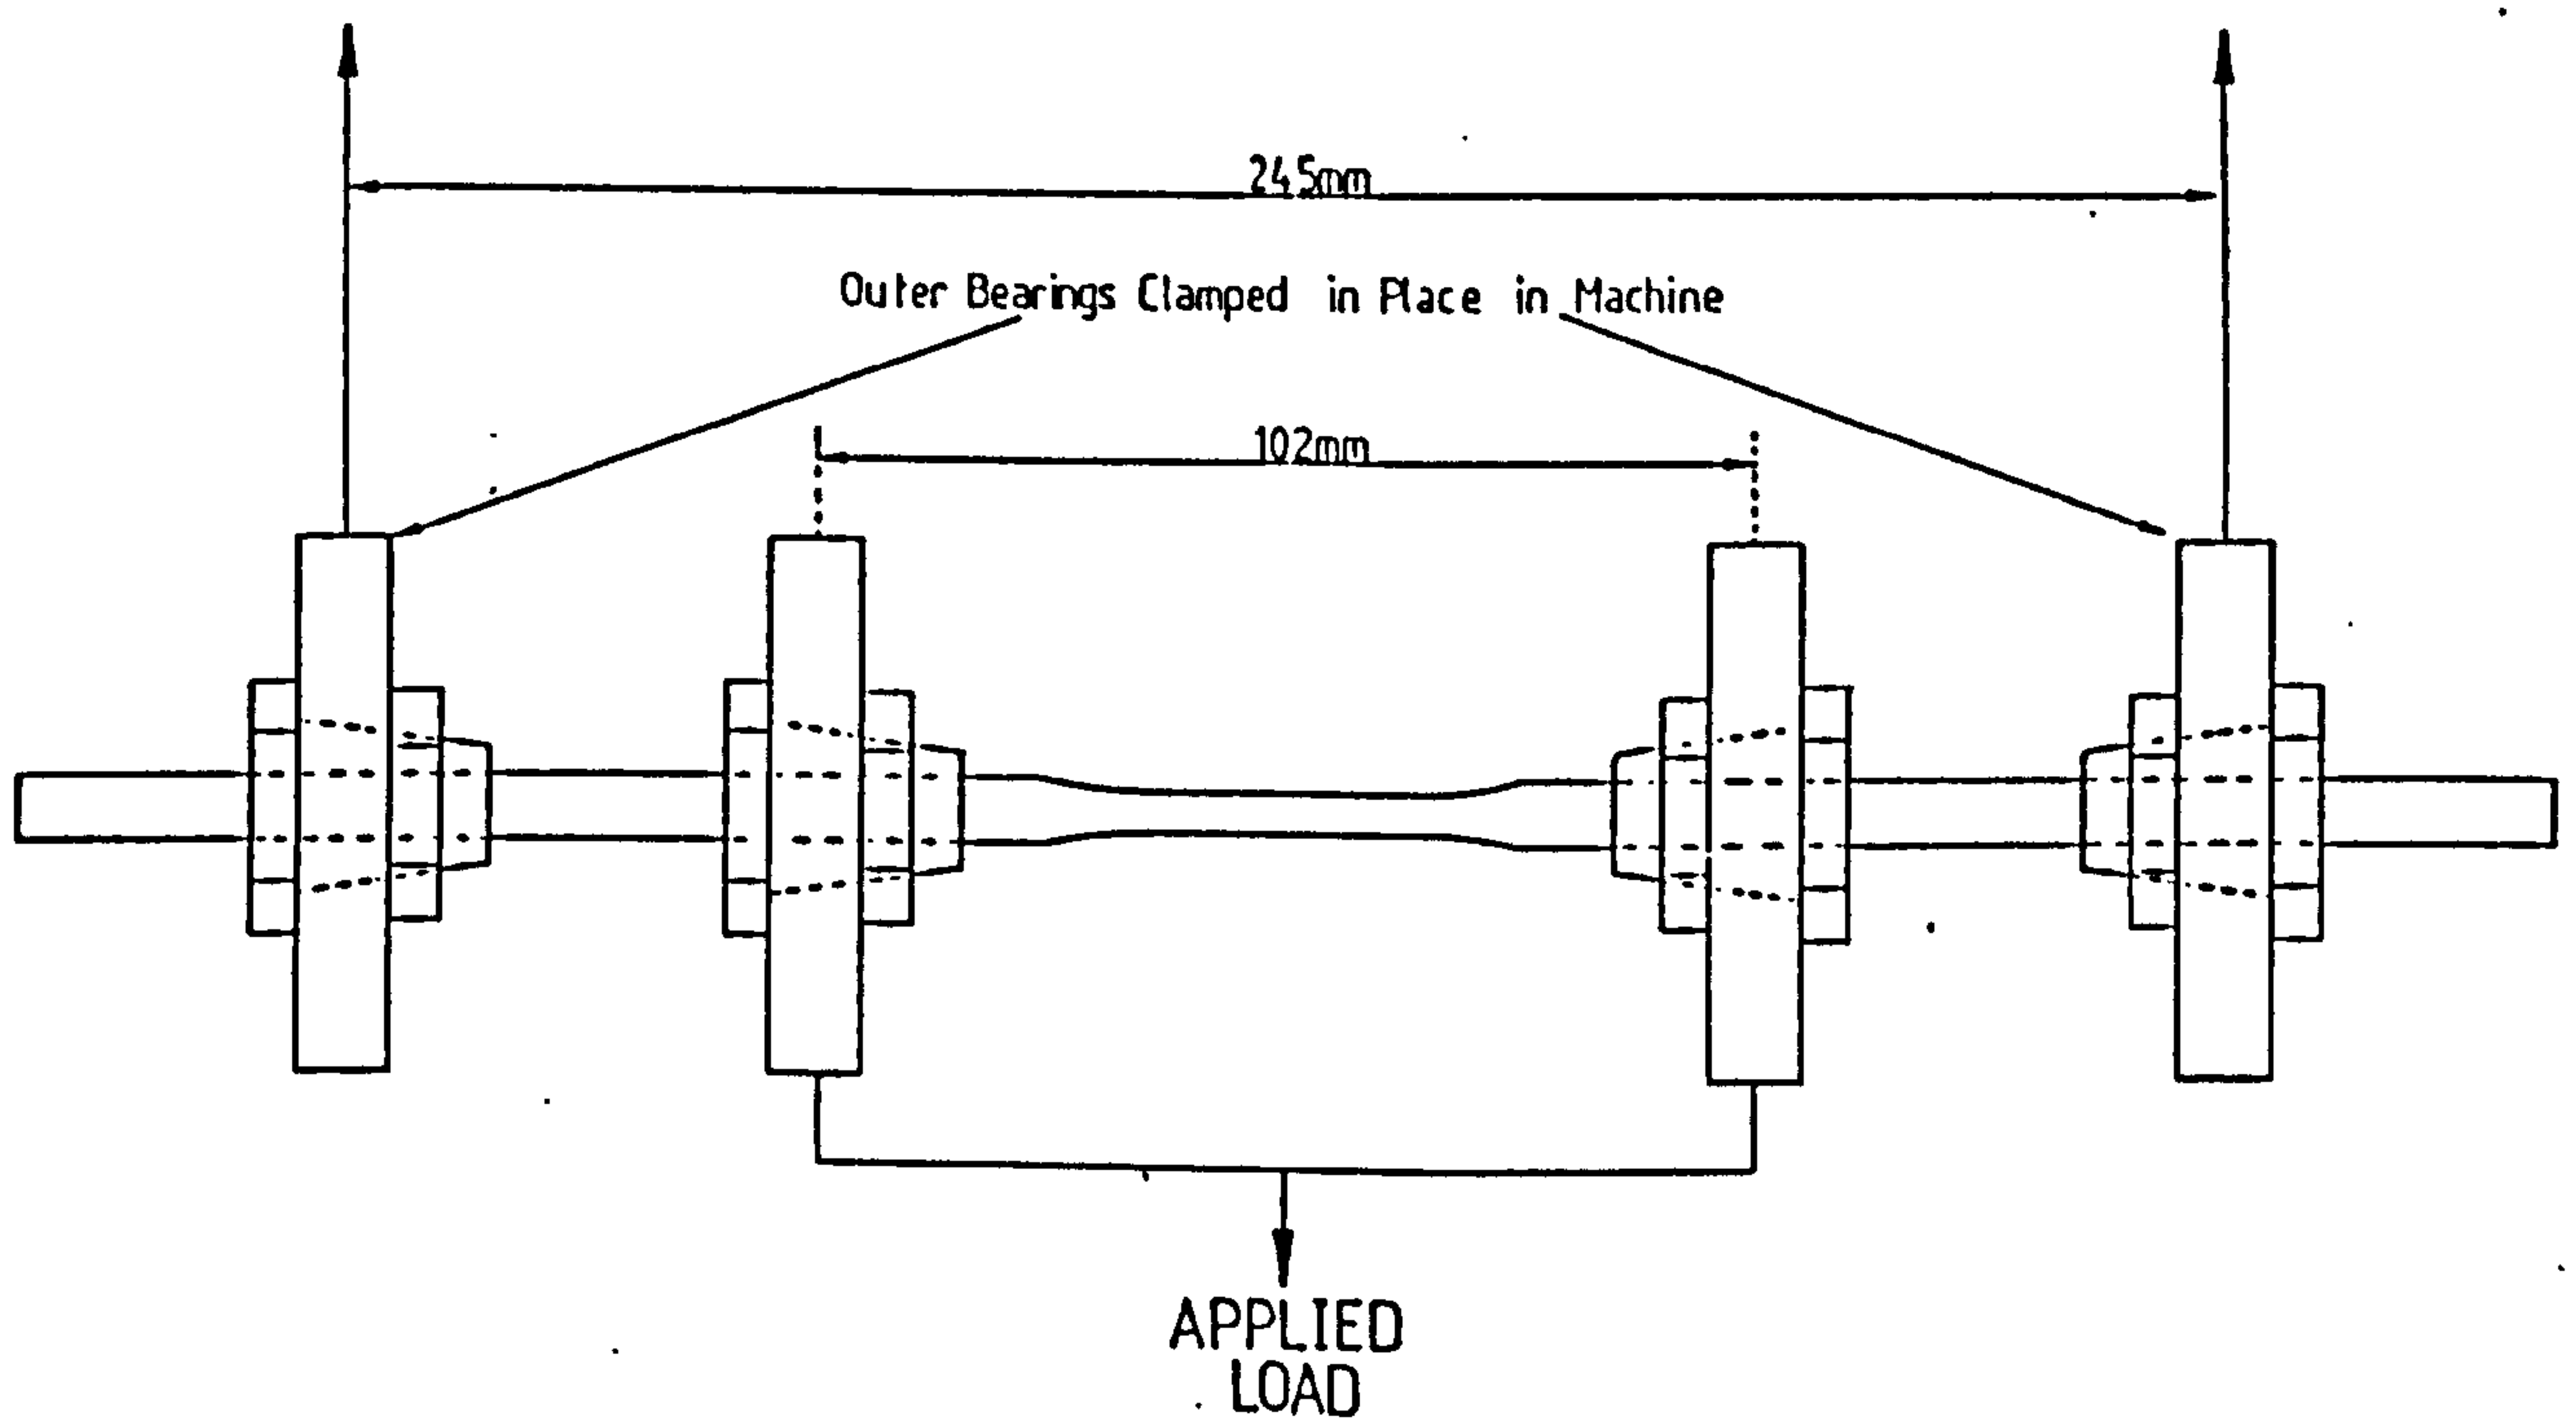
Specimen dimensions and loading arrangement used in the reversed-bending tests.
